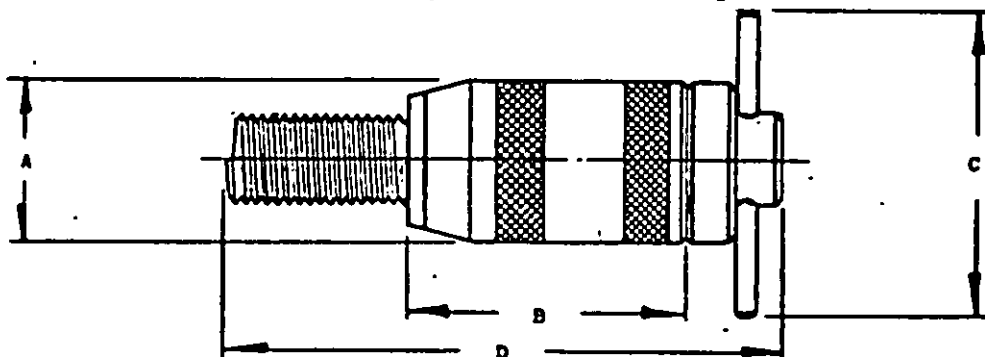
Type III, class 1, style B prewinder inserting tool for 9/16(.5625) through 1-1/2(1.500) Unified Fine Series.
